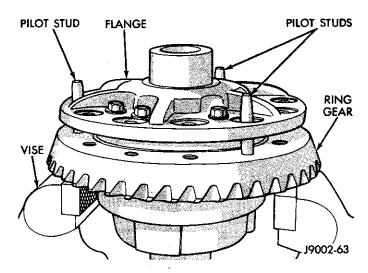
Differential Case-To-Heated Ring Gear Alignment
